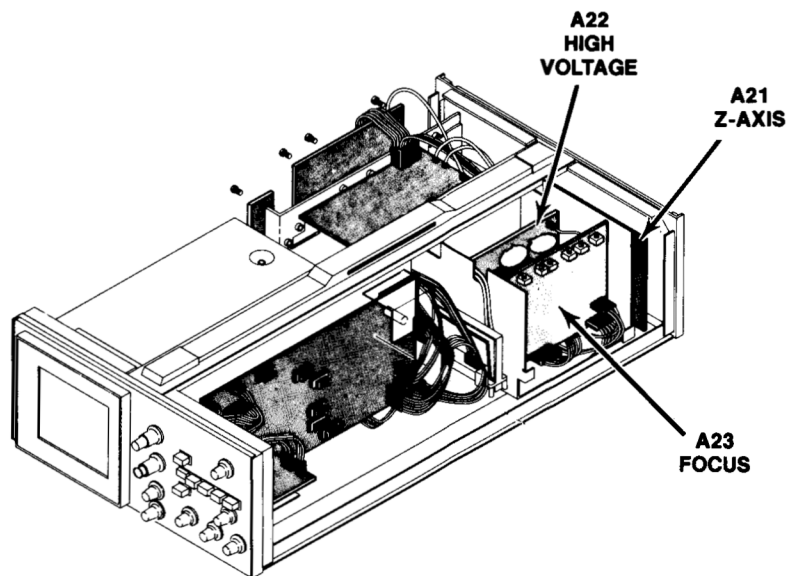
A21-Z Axis Circuit Board Assembly.
